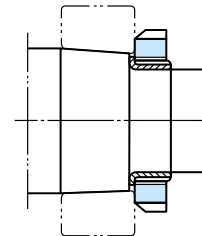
Adapter Using Washer (Bearing Bore  $\leq$  200 mm)
